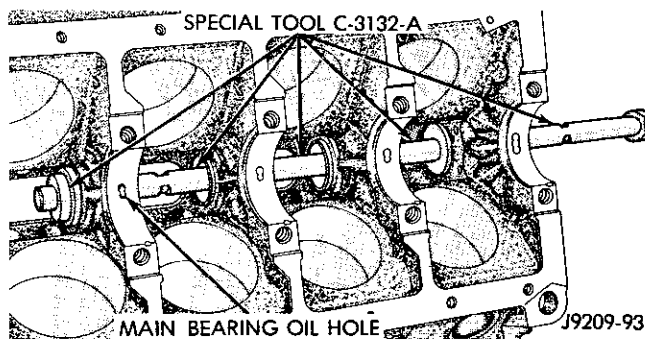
Camshaft Bearings Removal/Installation with Tool C-3132-A
